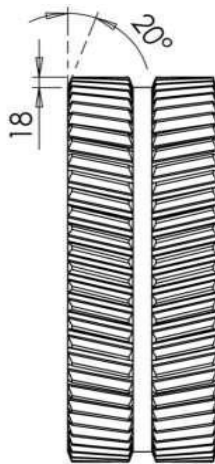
2D Detail Drawing of Gear with Taper Edges Module 12 Gear Dia 234 & Dia 675
